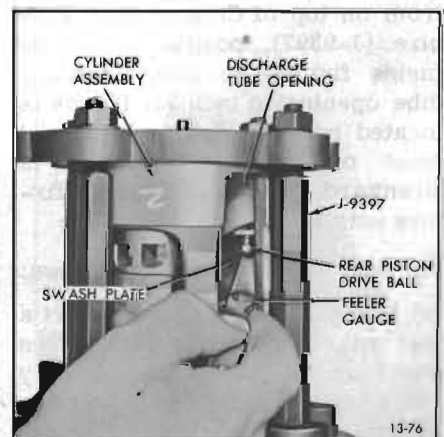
Checking Clearance Between Rear Piston Drive Ball and Swashplate
